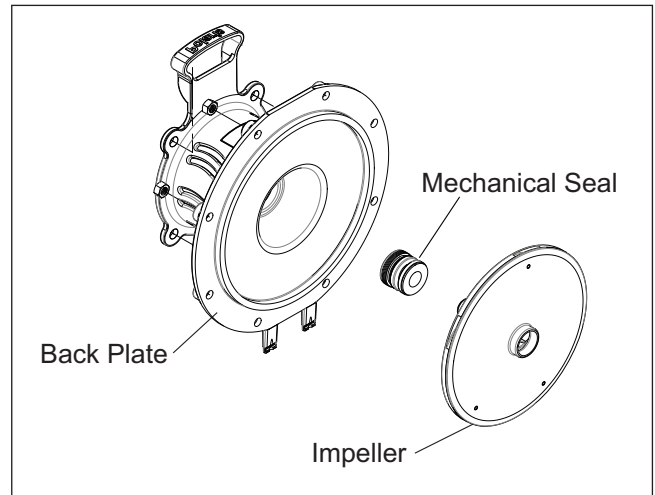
Back Plate, Impeller and Mechanical Seal Location
